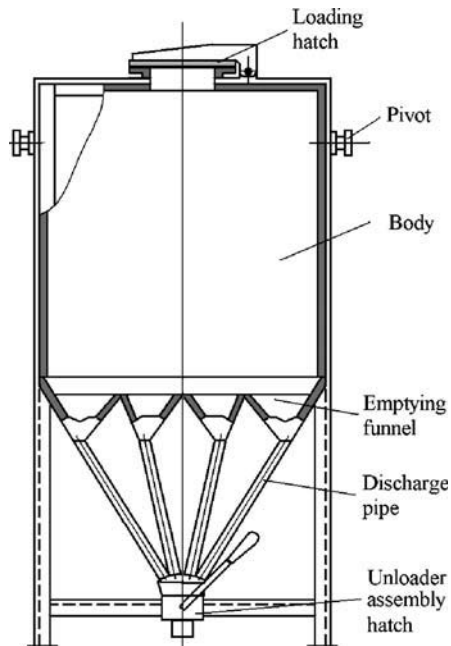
Container with bottom fulfilling in spitzkasten form for marketable powder.
